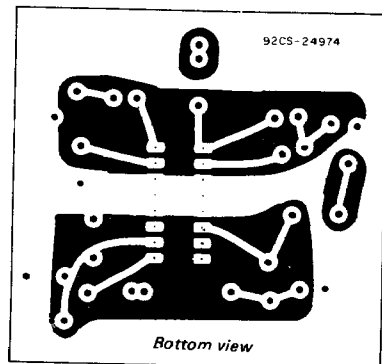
Printed-circuit board (actual size) containing the test circuit, shown in Fig. 3, for the CA3131EM.
